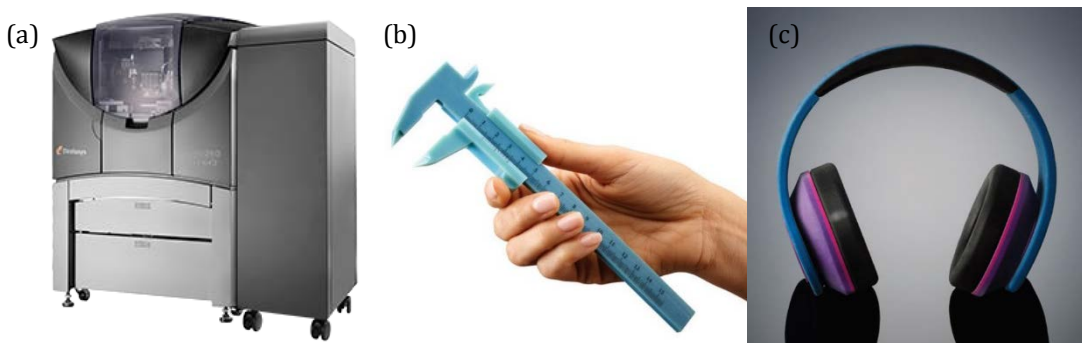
Stratasys Objet260 Connex3 (a). (b) Caliper: example of this 3D printer's precision. (c) Headphones: example of piece printed with different materials. The pads are printed with a rubbery material while the main structure is printed with a rigid one.
